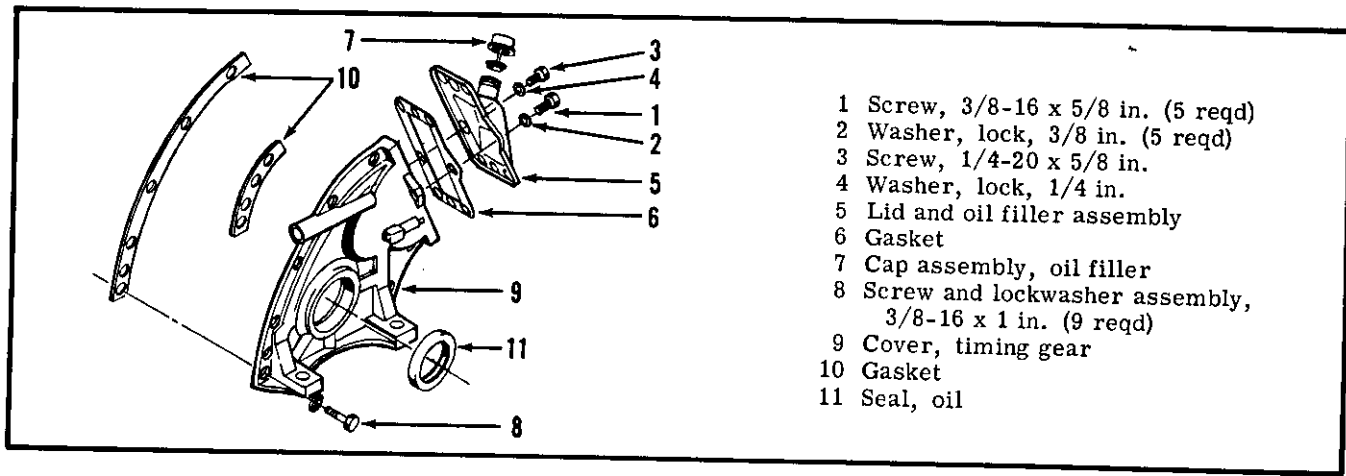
Engine Timing Gear Cover, Disassembly and Reassembly
